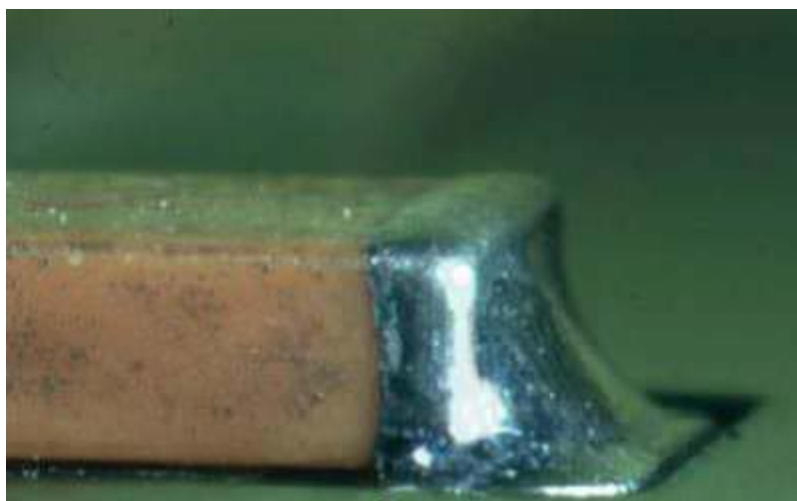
Acceptable, maximum solder (see also Table 11-1)
